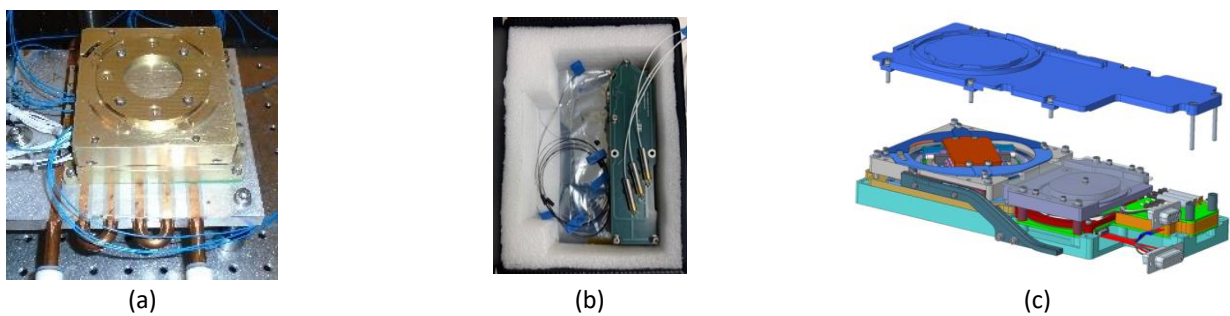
(a) TRL-6 PA package on a ground support equipment (GSE) chiller plate and (b) detector board as built for the TRL-6 LH. (c) The improved PA module design for the EDU LH combines both the PA and detector board in a single unit.
